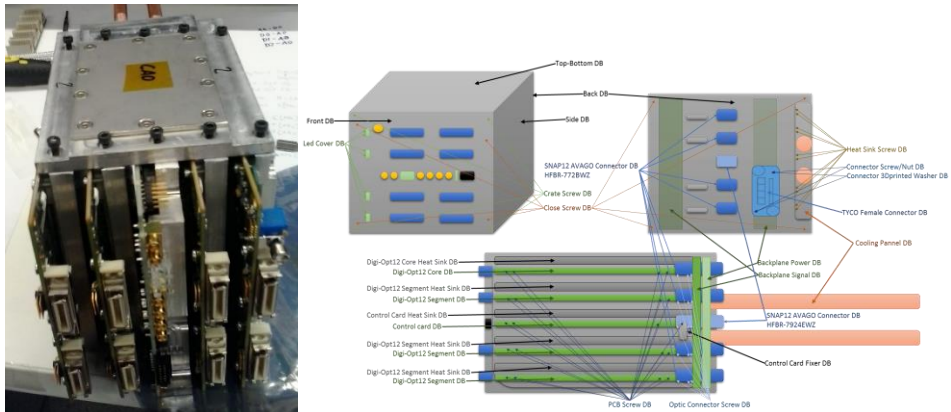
Digitizer box disassembly image and mounting schematics.
